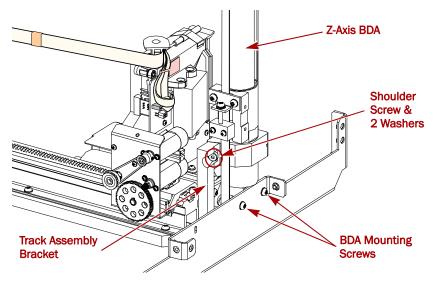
Location of the 1/8" Hex Shoulder Screw
